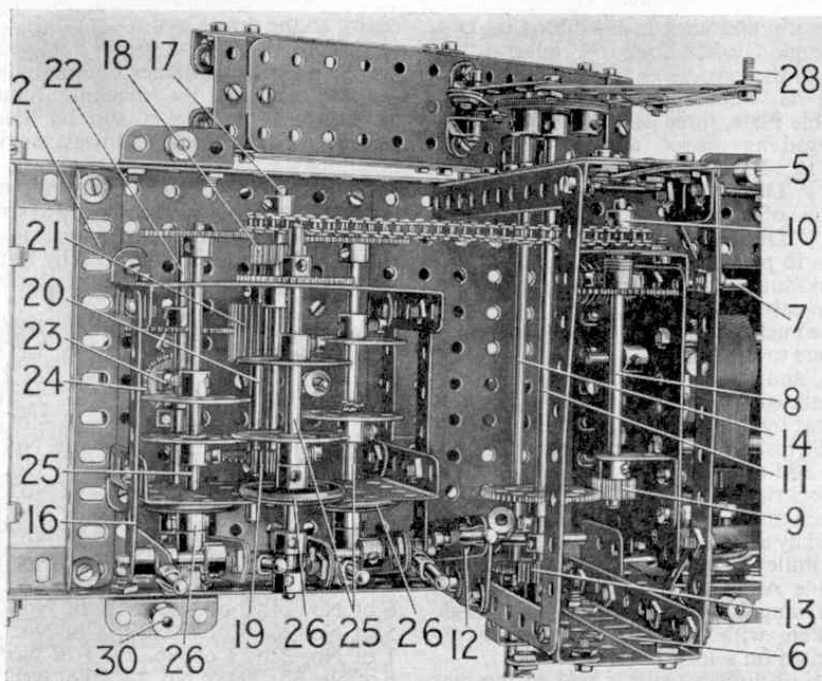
An overhead view of the cab base that shows the arrangement of the winding drums in the gear-box.
